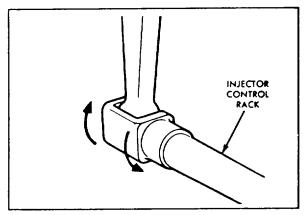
Checking Rotating Movement of Injector Control Rack
